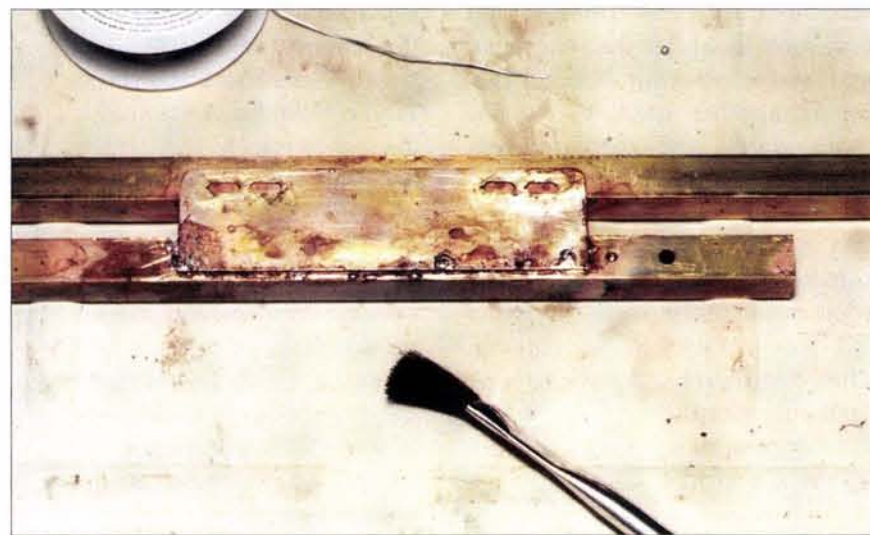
Soldering the mounting tab to the guide tube. The square tube in the upper supports the tab while "sweating" the tab to the tube. I used the back side of a ceramic pizza stone as my work surface.
